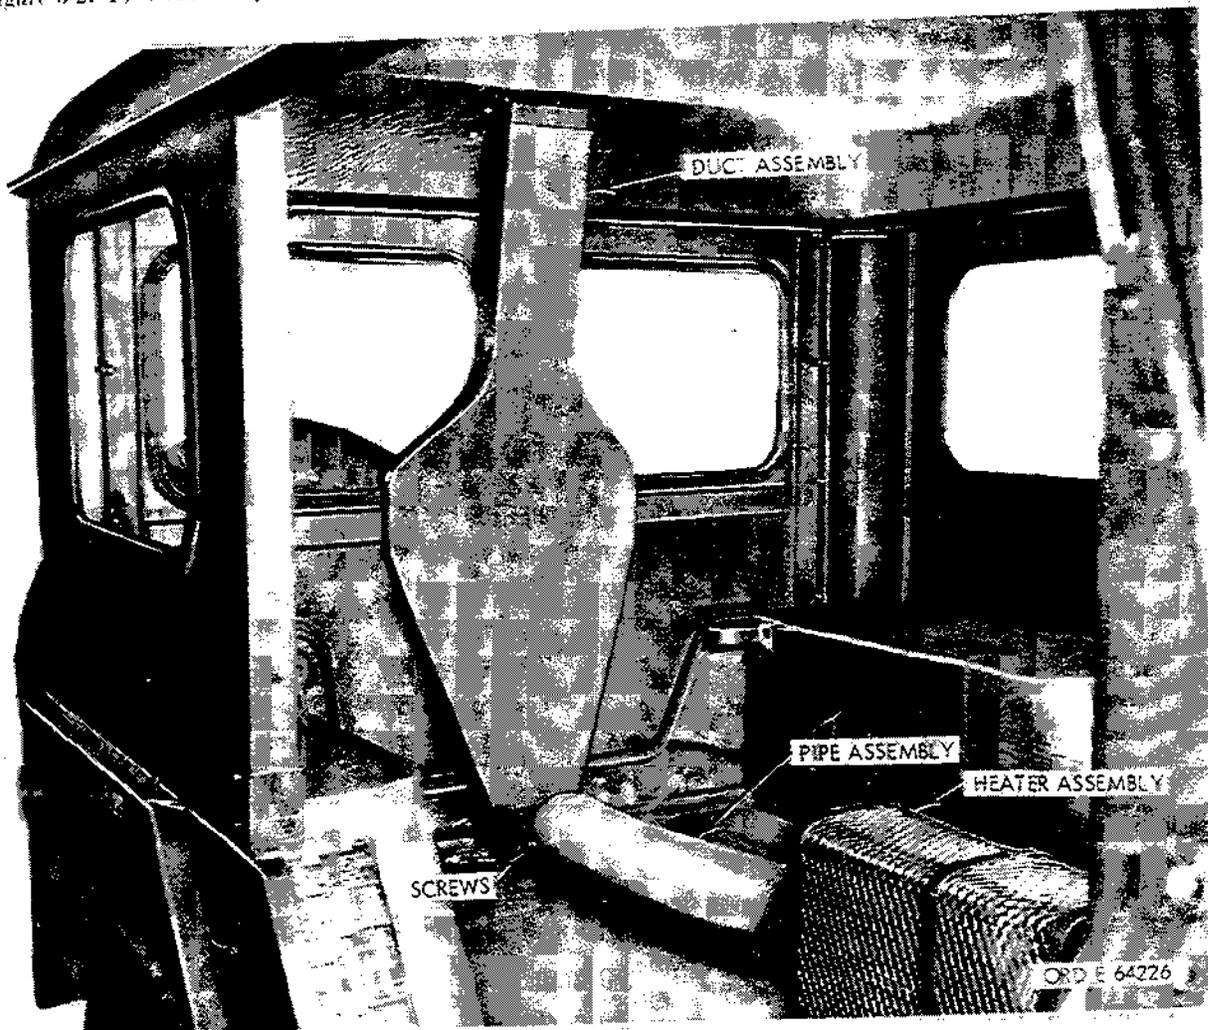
Air inlet duct and heater installation on M151 & M151A1, and M151A2, 1/4 ton utility truck.
